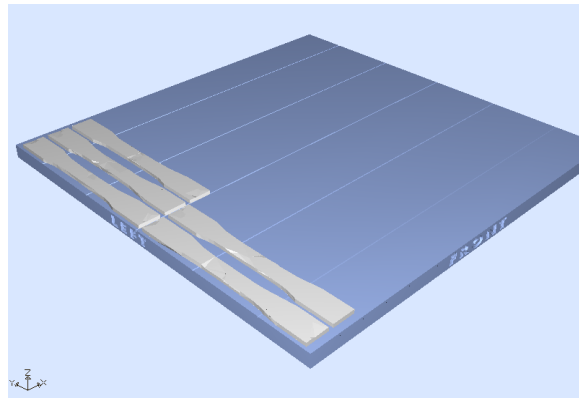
Build platform layout for “YXT” (specimens oriented in the y-axis, flat z-orientation, and tight part spacing) experiment.
